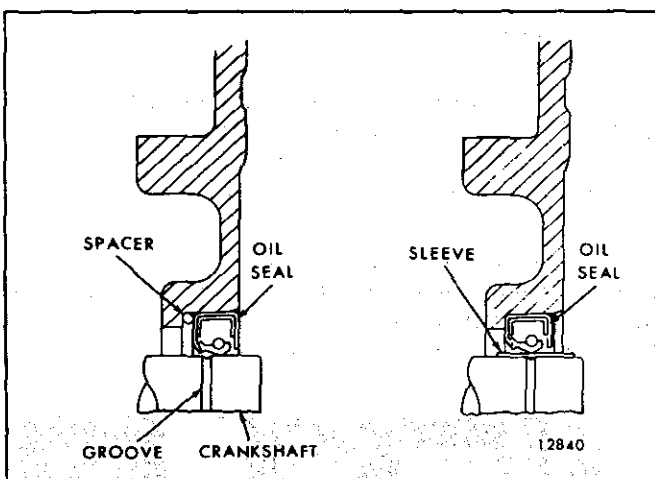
Use of Rear Oil Seal Spacer or Sleeve on Grooved Crankshaft (8V-53 Engines)
